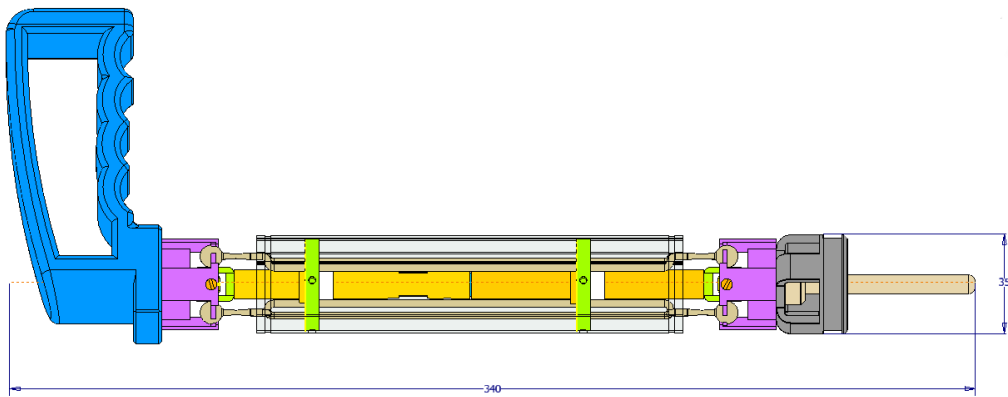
Dimensions of assembled uterine manipulator (dimensions are given in mm).
